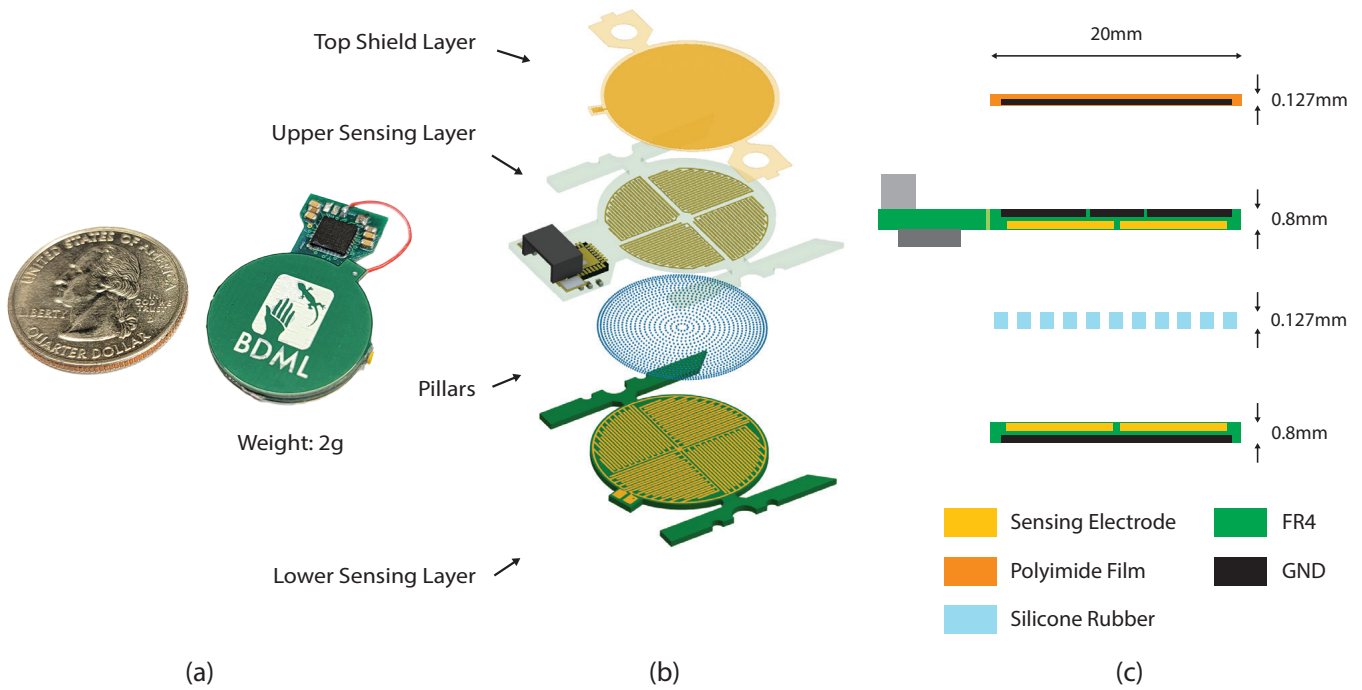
(a) CoinFT is approximately the size of a U.S. quarter-dollar coin. (b) Exploded view of CoinFT. It consists of two rigid PCBs (upper and lower sensing layers) connected with an array of silicone rubber pillars. The fPCB top shield layer provides passive shielding. (c) Dimensions of each layer. The overall thickness is approximately 2 mm.
